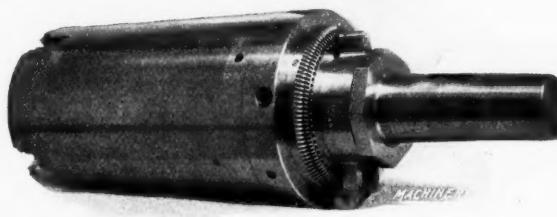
A Large Rifling Head, showing Rotating Adjustment.
